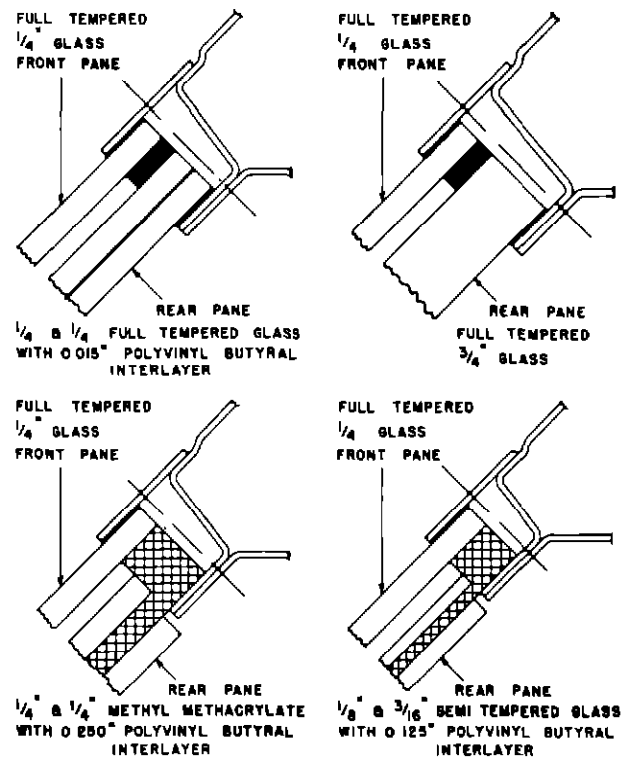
Type III Windshield Panel Double Pane With Rigid or Clamped Edge Type of Mounting
